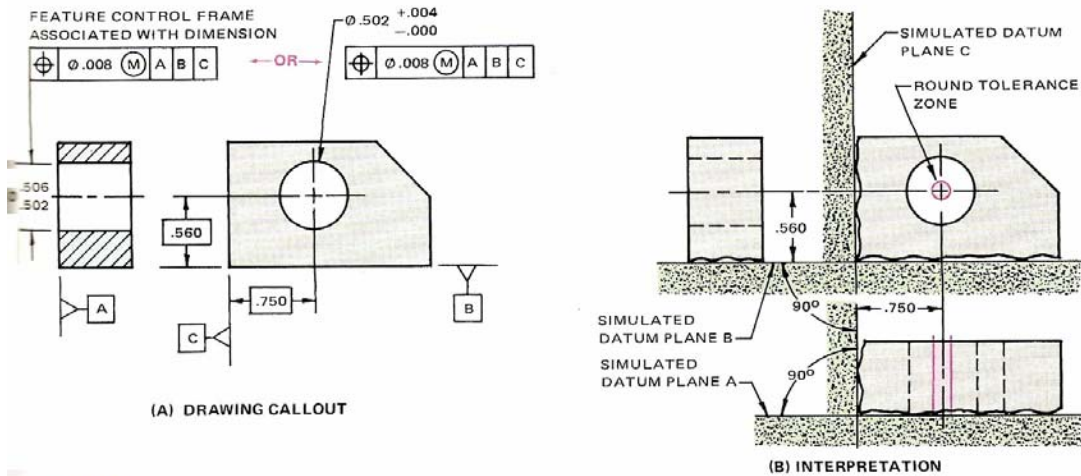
Positional tolerancing—MMC.
